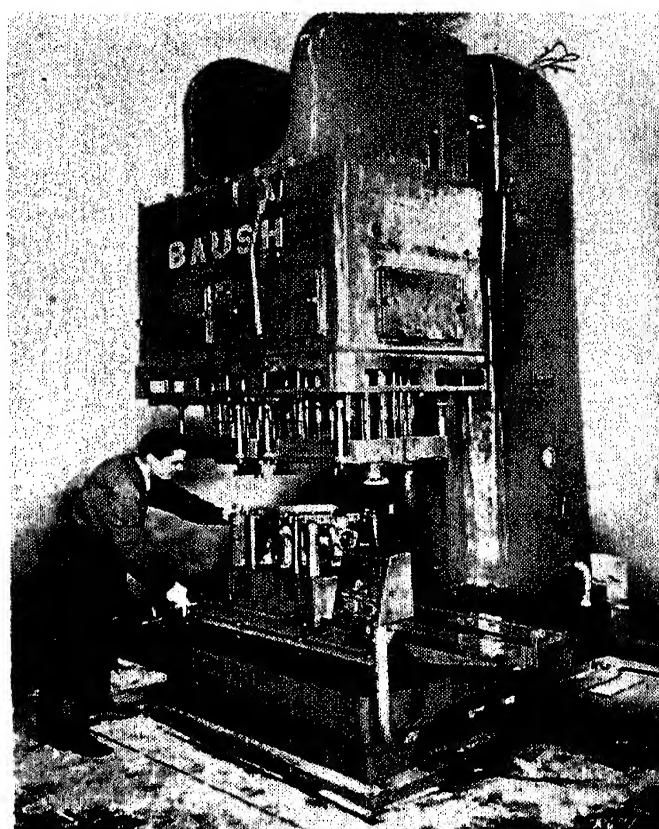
A multiple spindle drilling machine for drilling 50 holes in a gear case. (Courtesy Baush Machine Tool Co.)
